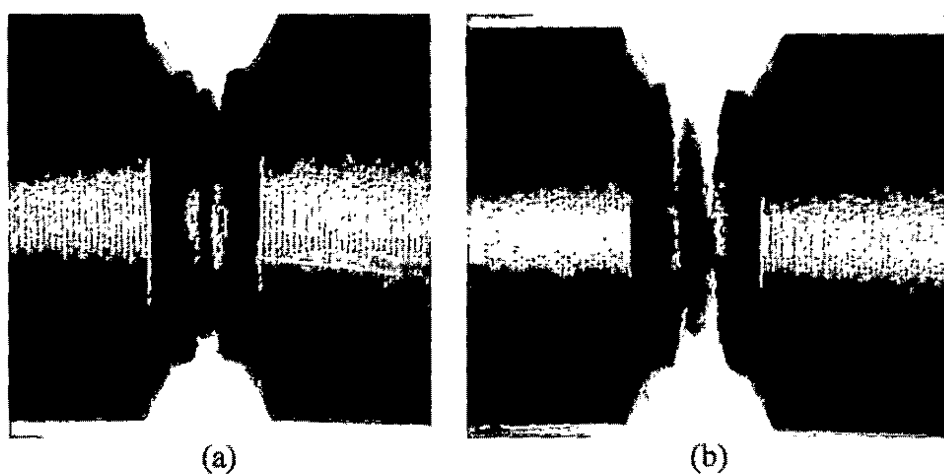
Side view of fracture surfaces of sharp notched specimens from tensile experiments at (a) 0.5 mm/s and (b) 0.05 mm/s.
